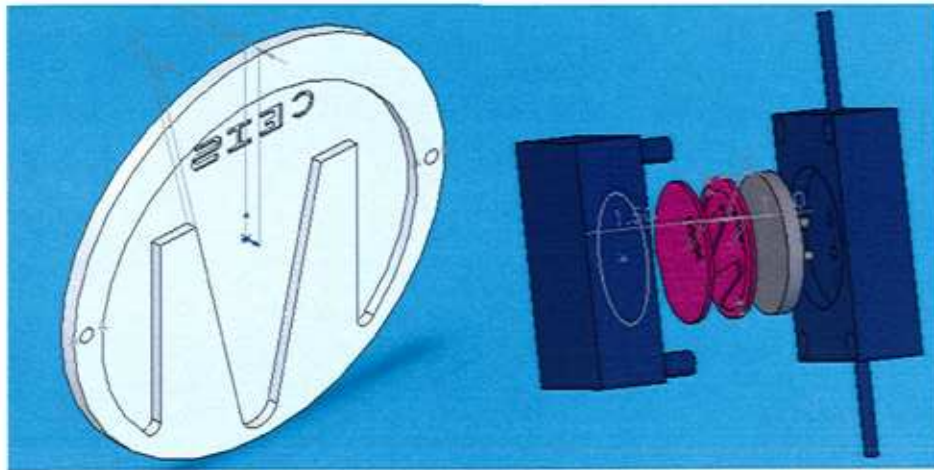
3D design of logo paper clip design showing both sides of insert and mould tool assembly
